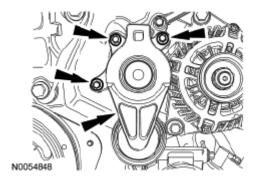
Locating Accessory Drive Belt Tensioner Bolts Courtesy of FORD MOTOR CO.
